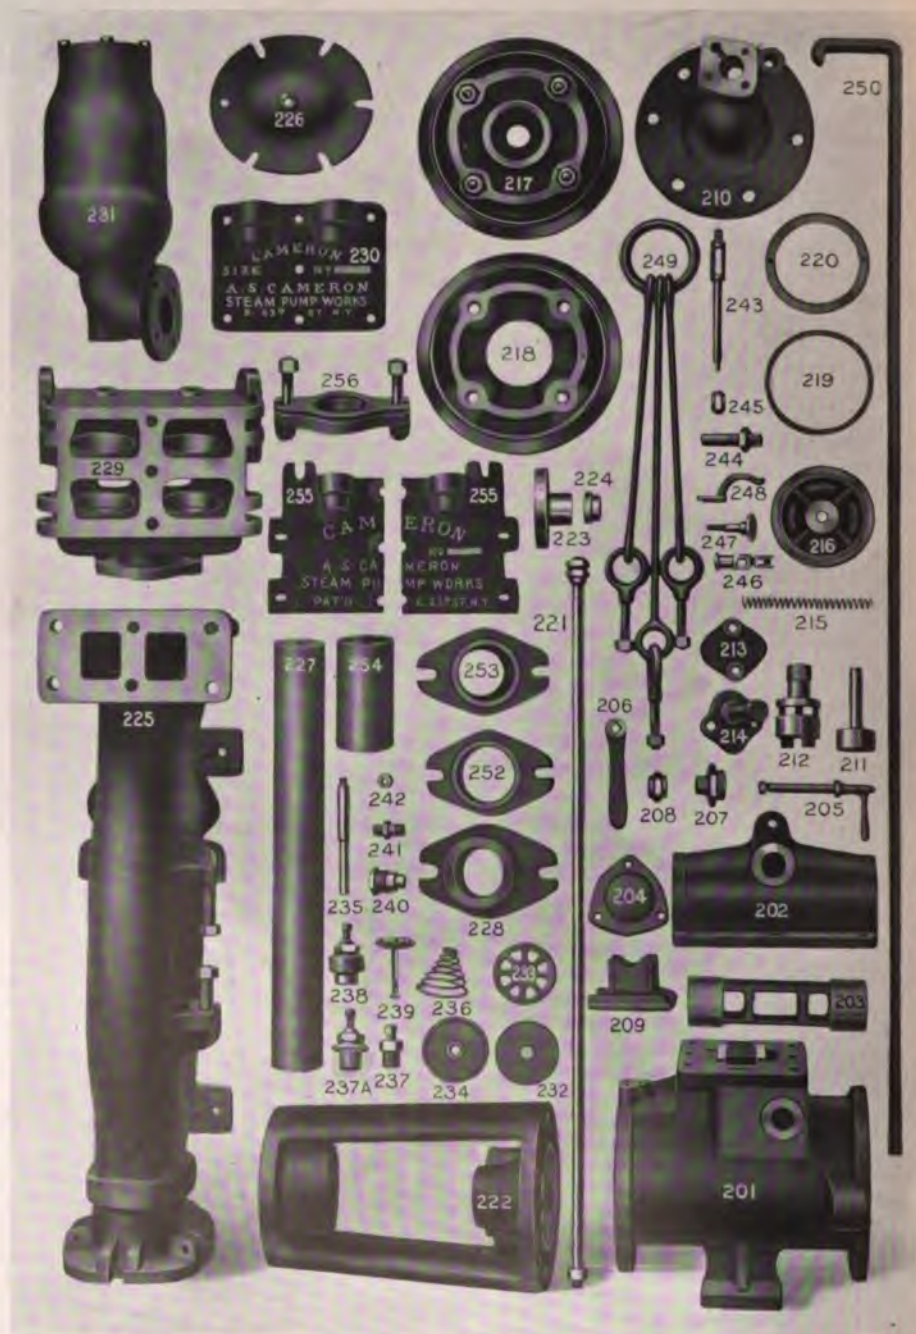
DETAILS OF CAMERON REGULAR AND BOILER FEED PUMPS
